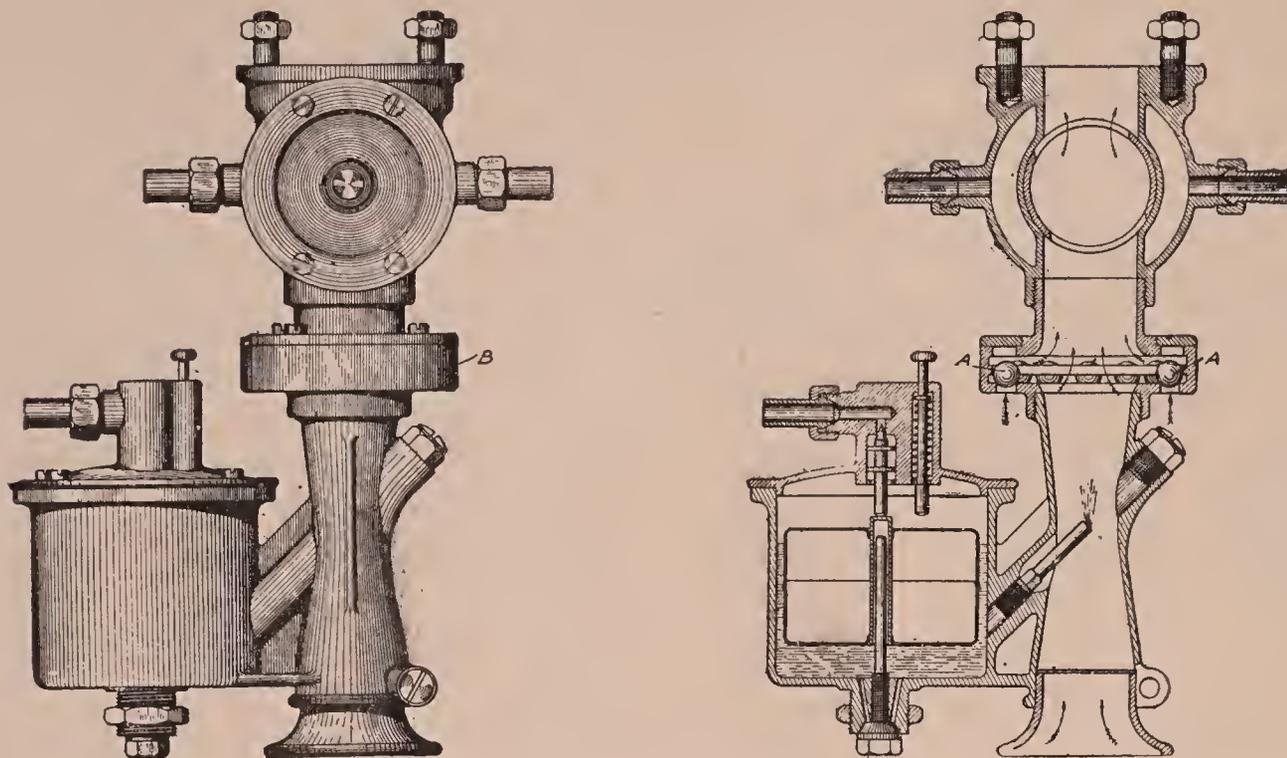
The G and A carburetor in elevation and section—note the ball air valves.
